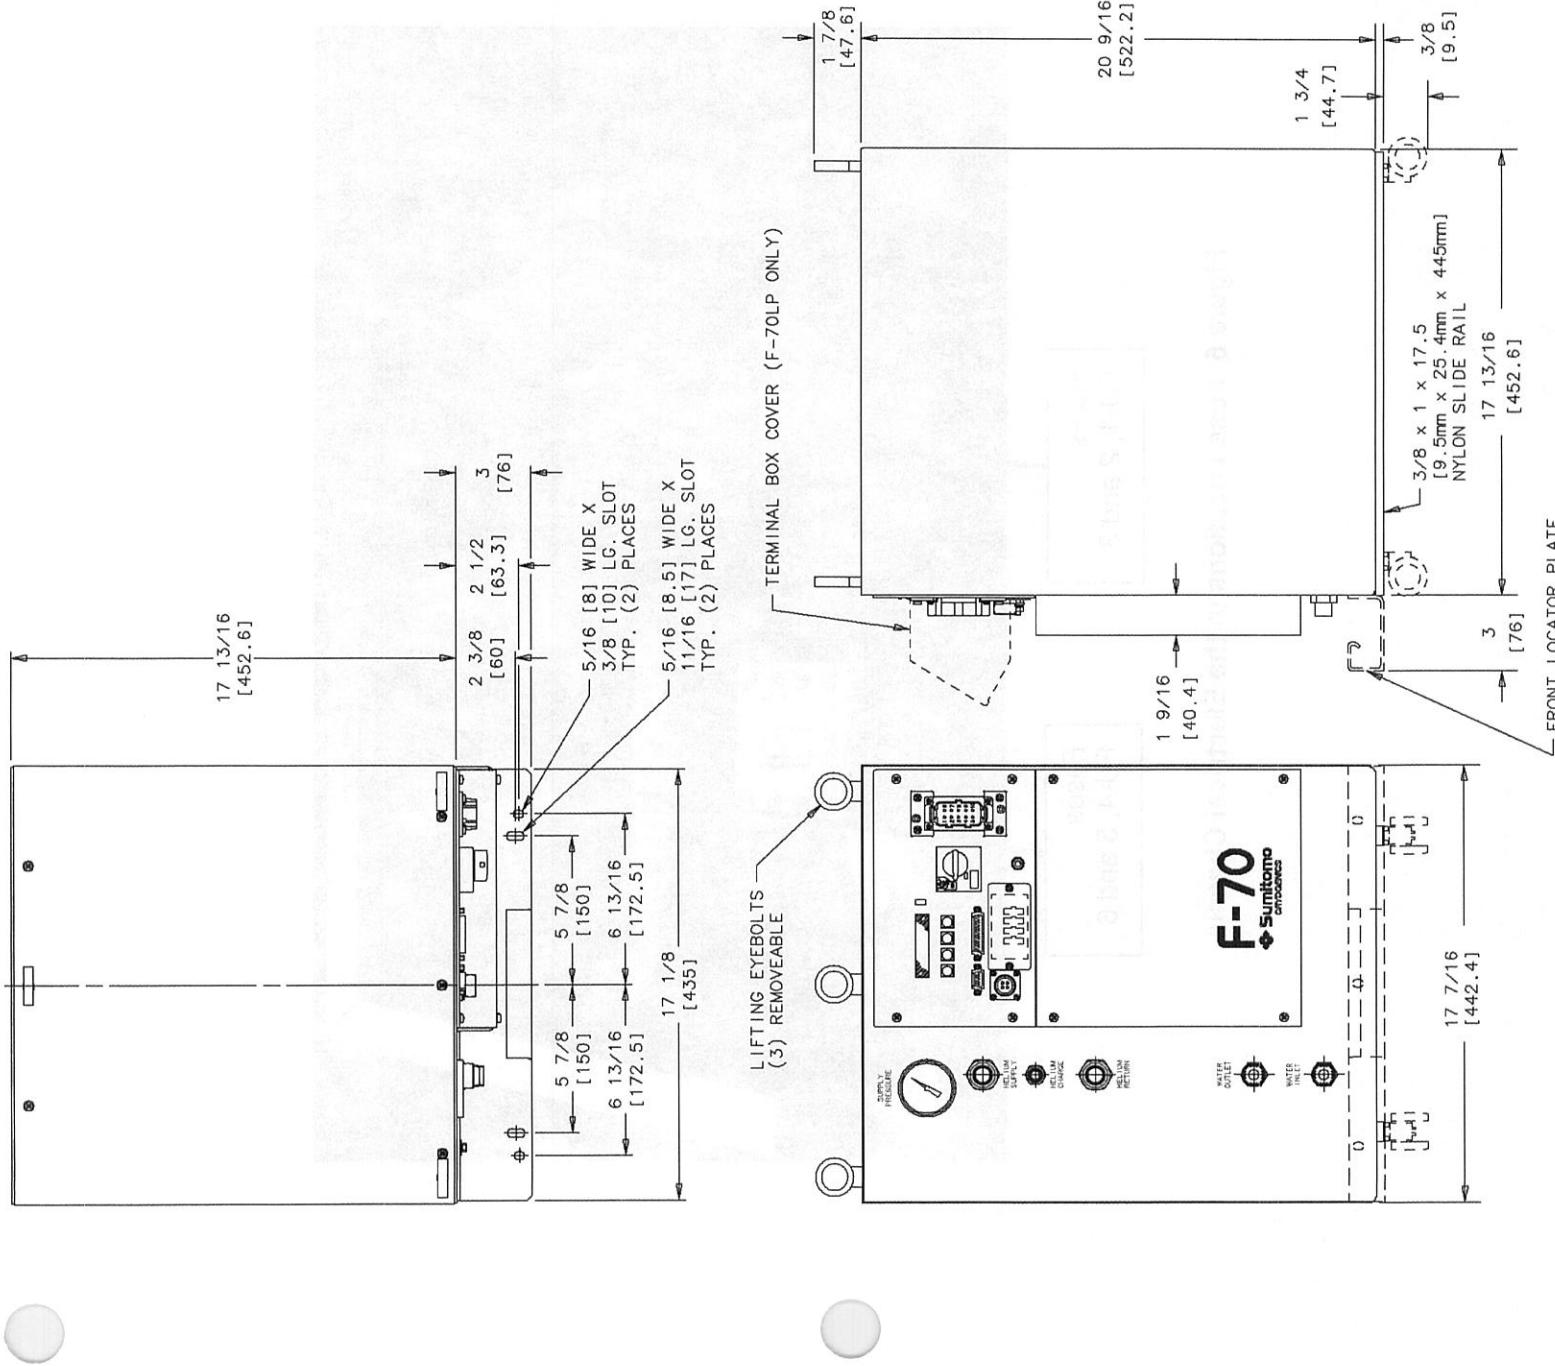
F-70H, F-70L and F-70LP Compressors, Dimensions
